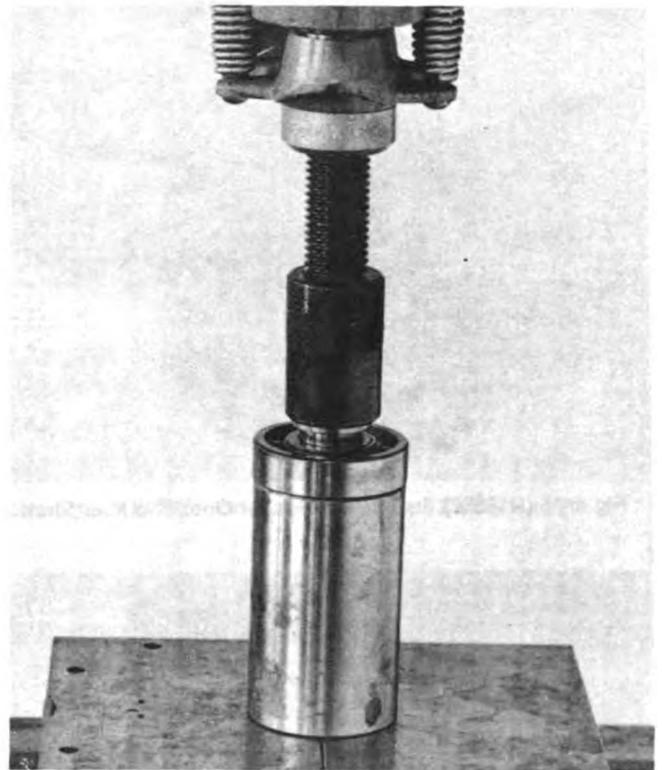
(N10855). Install The Bearing Onto The Shaft.
